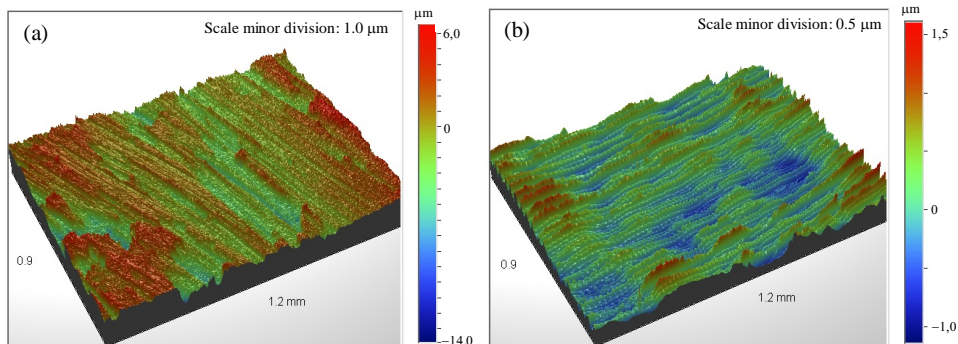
Workpiece surface milled at (a) conventional condition and (b) HSM.
